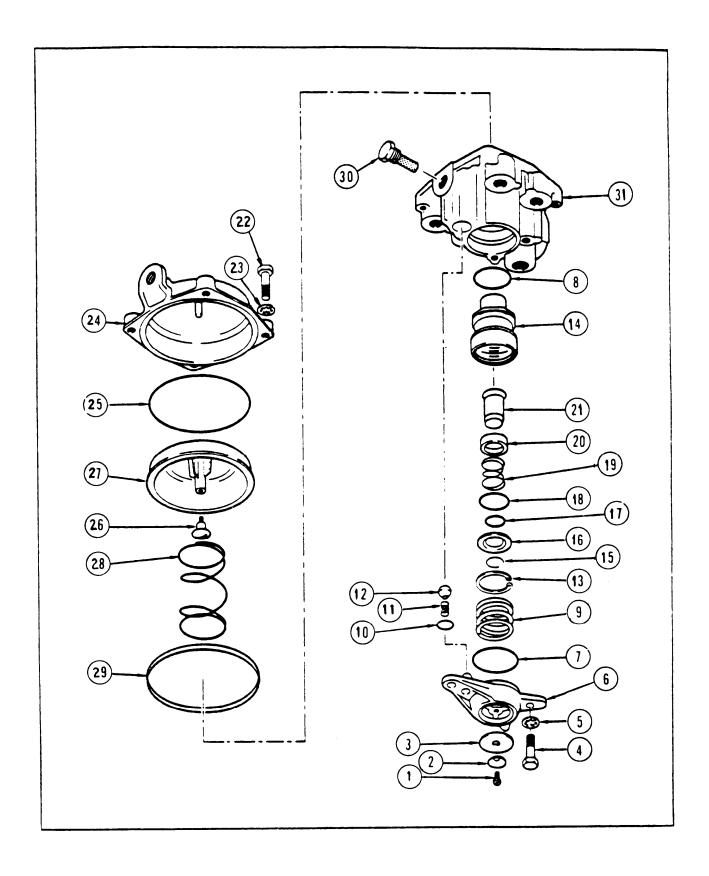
Trailer Brake Relay Valve and Adapter (ARMY)
